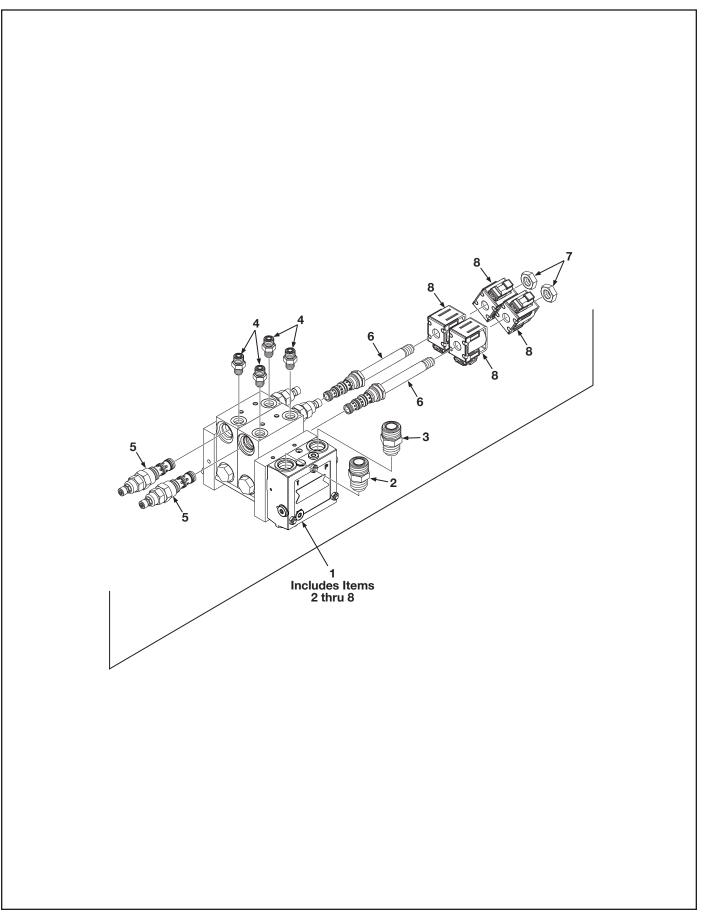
Hydraulic Valve Assembly, Cylinder Assembly and Related Parts
